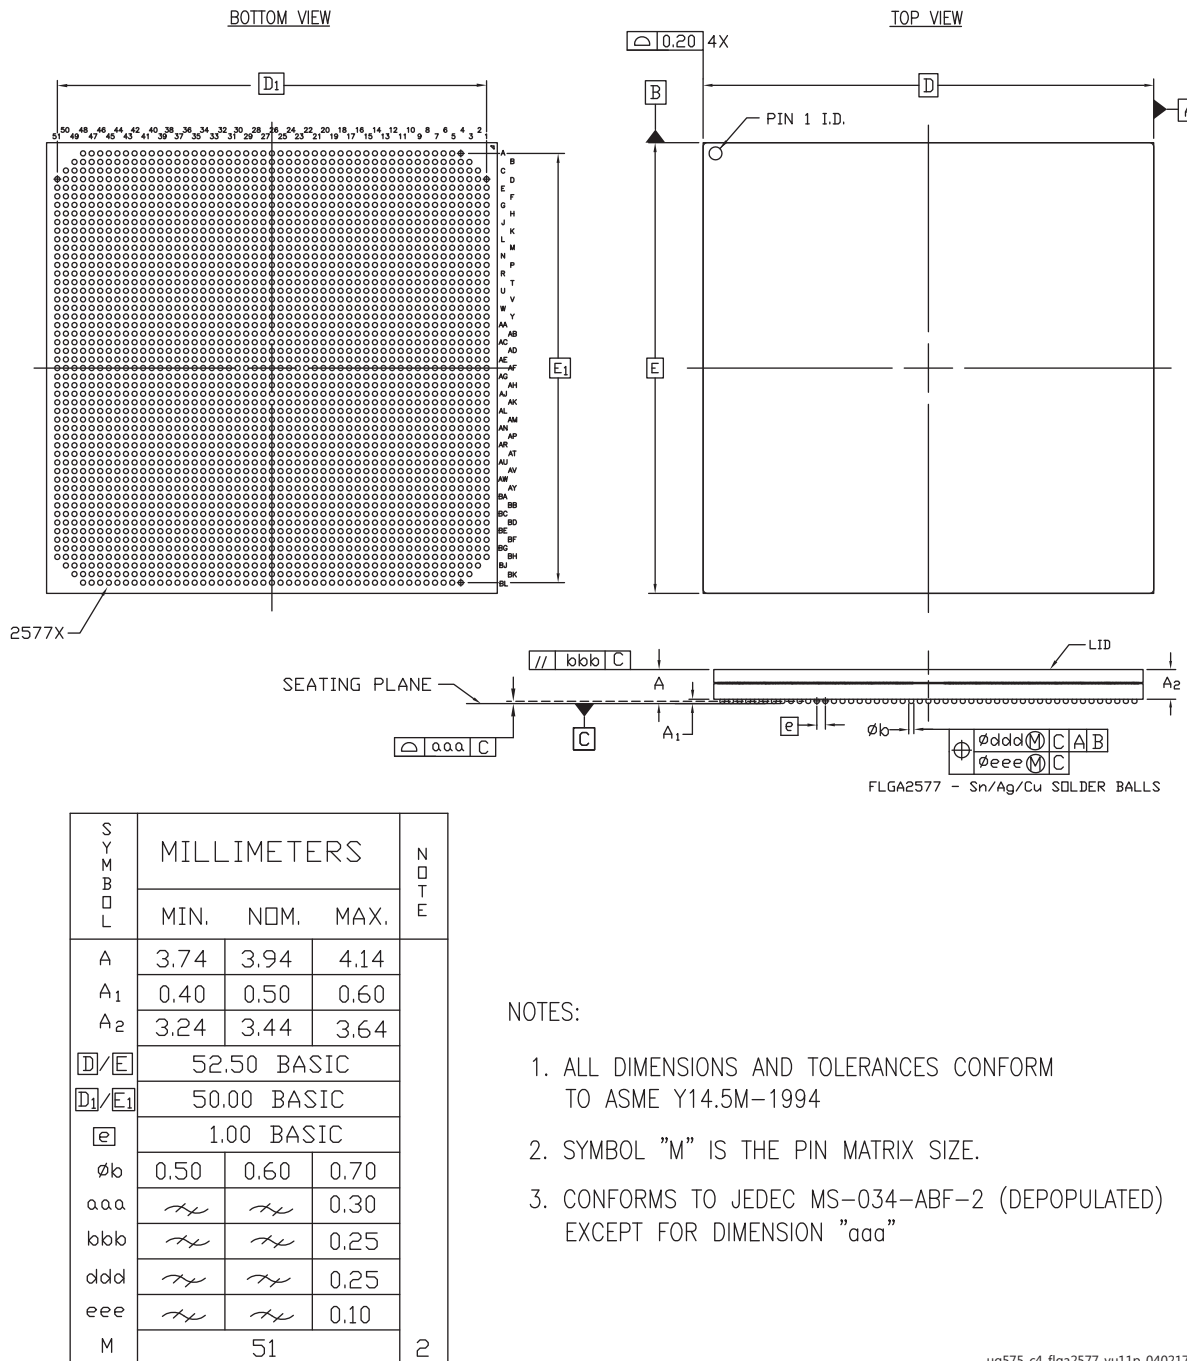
Package Dimensions for FLGA2577 (XCVU11P)
